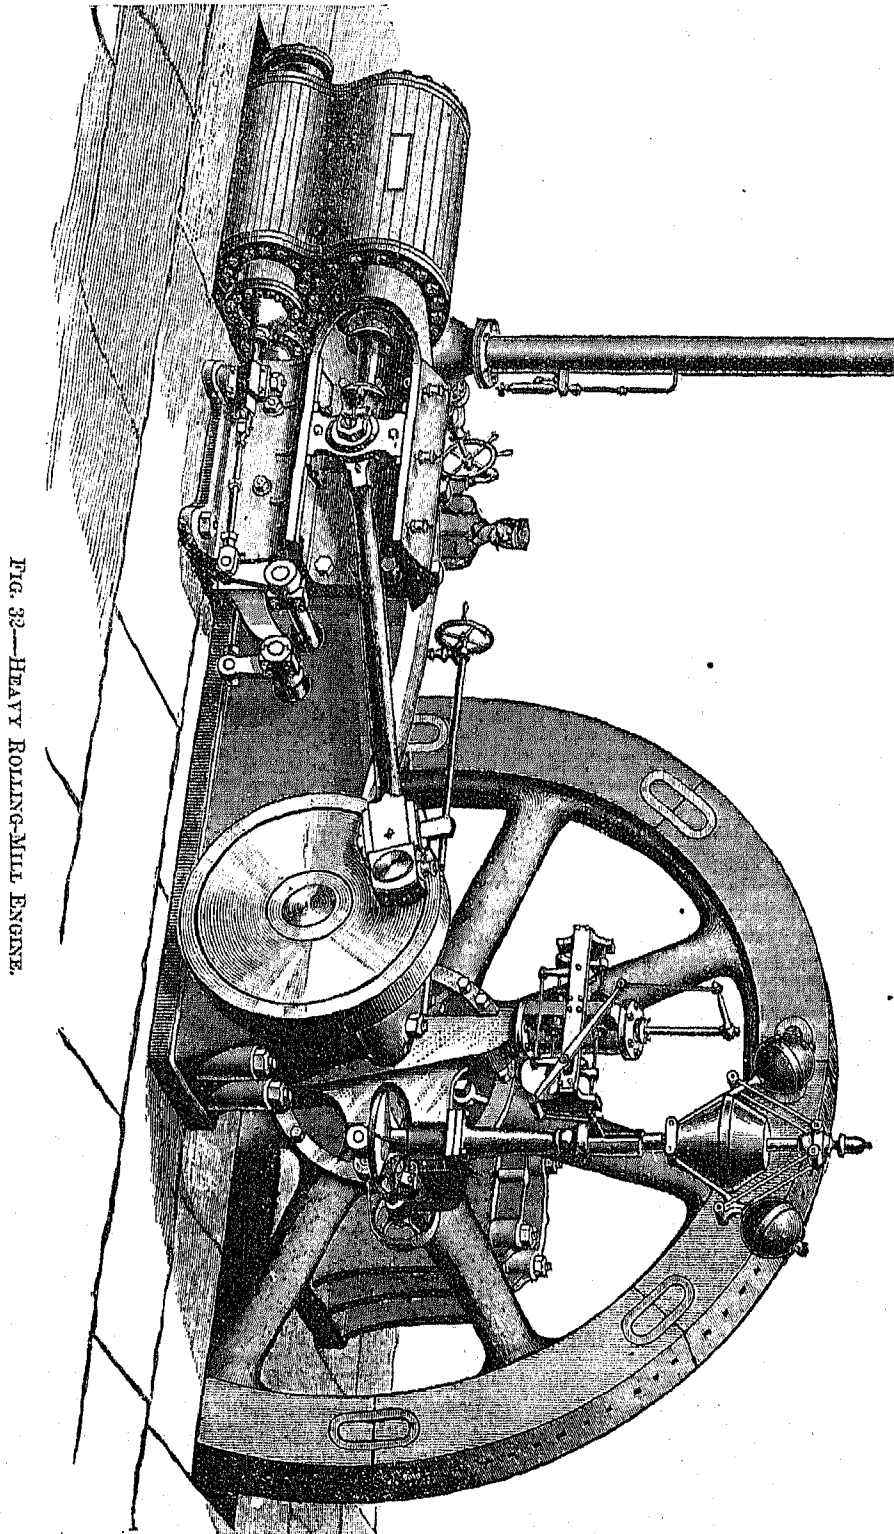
HEAVY ROLLING-MILL ENGINE.
